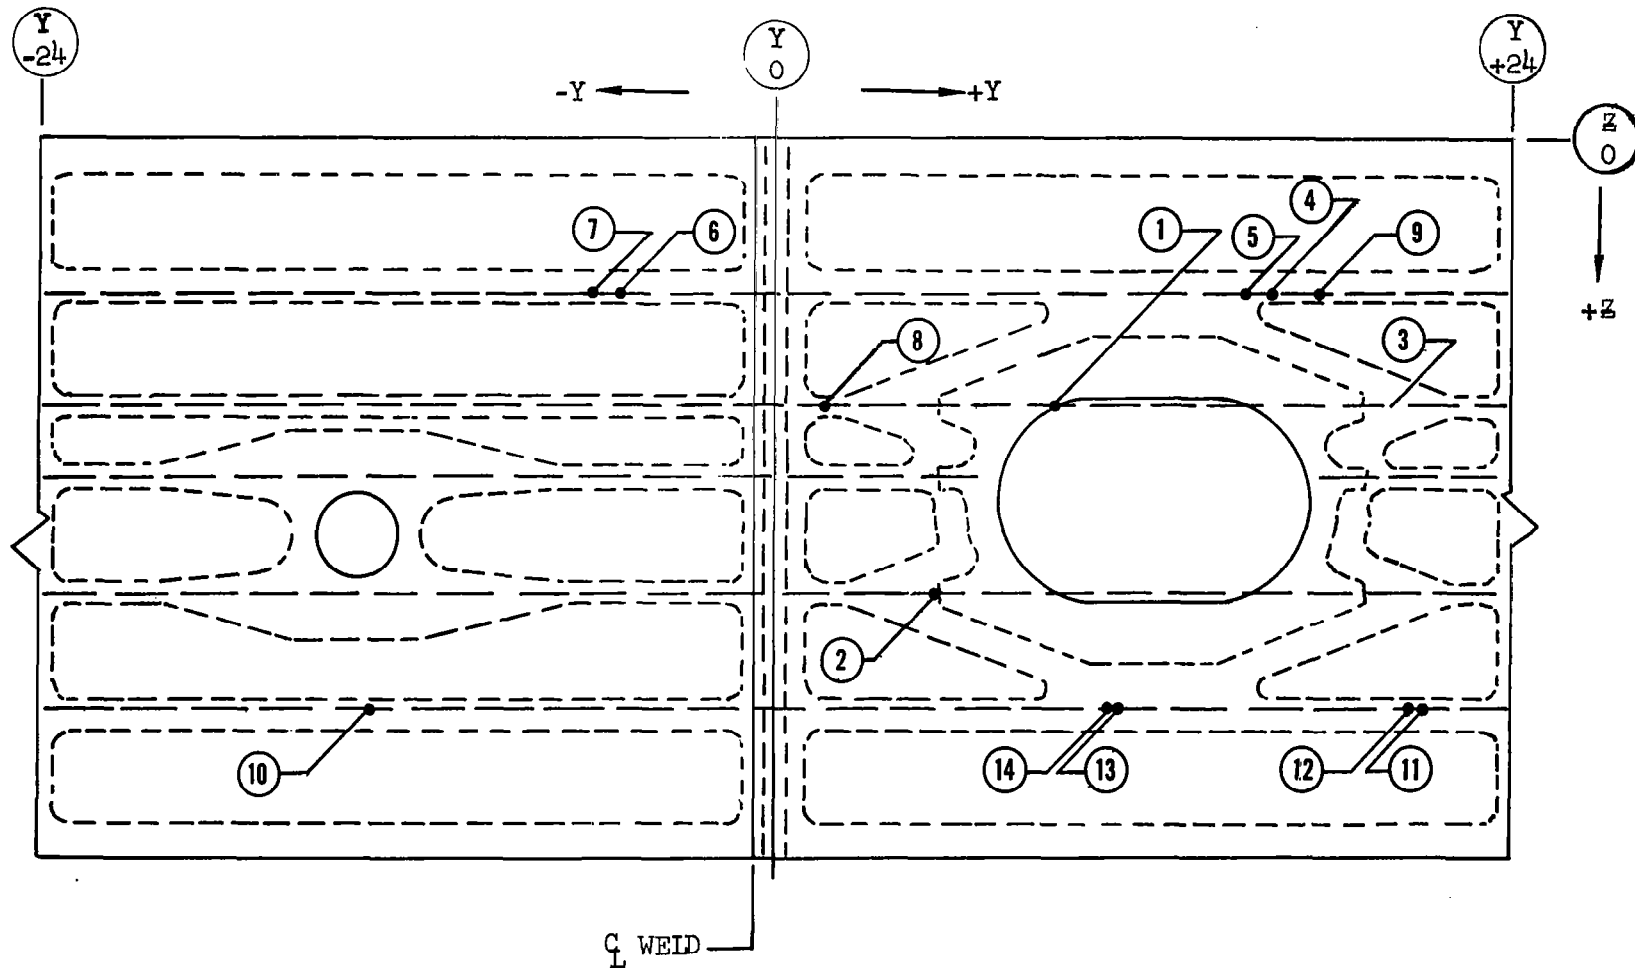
Fatigue Crack Locations in Specimen No. 4
